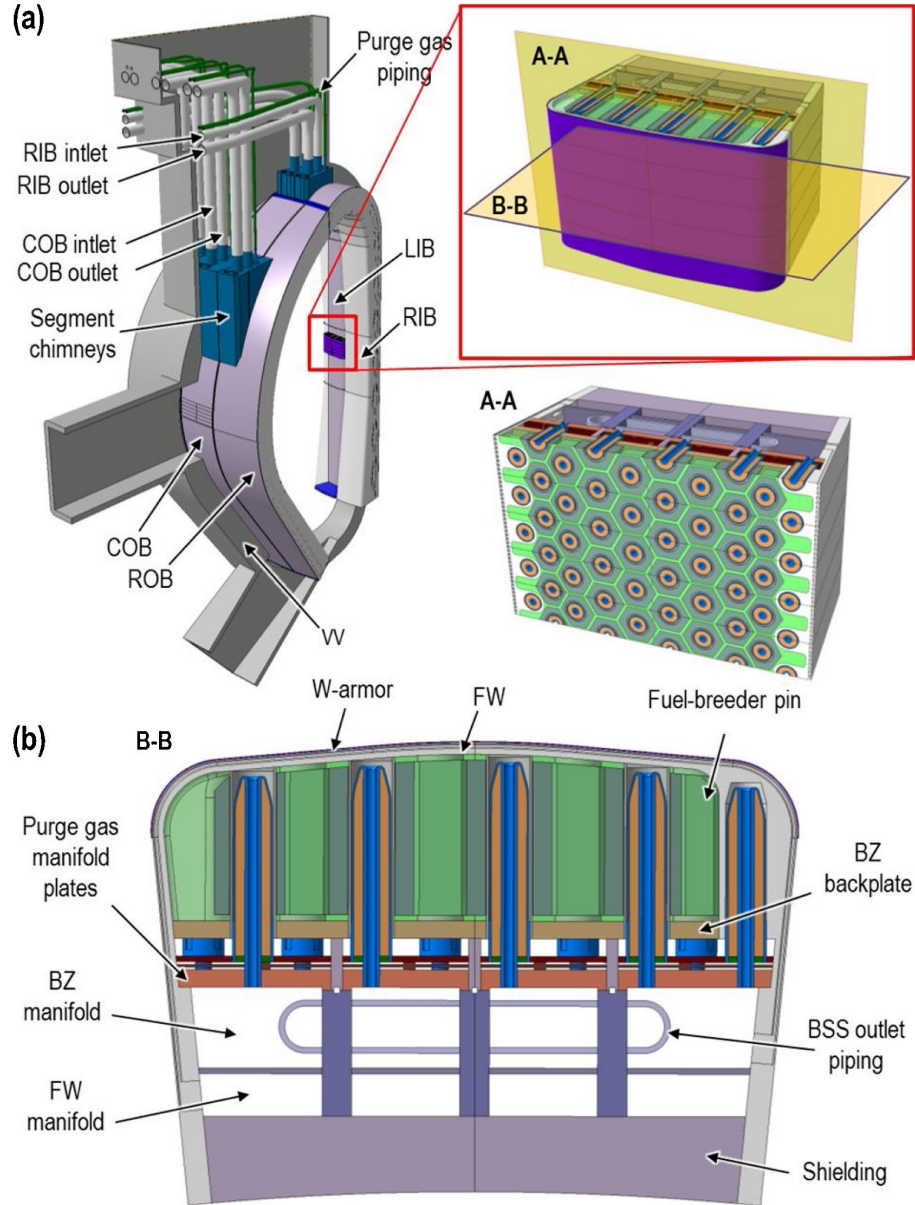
DEMO HCPB BB. Design with fuel-breeder pin hexagonal assembly [10].
